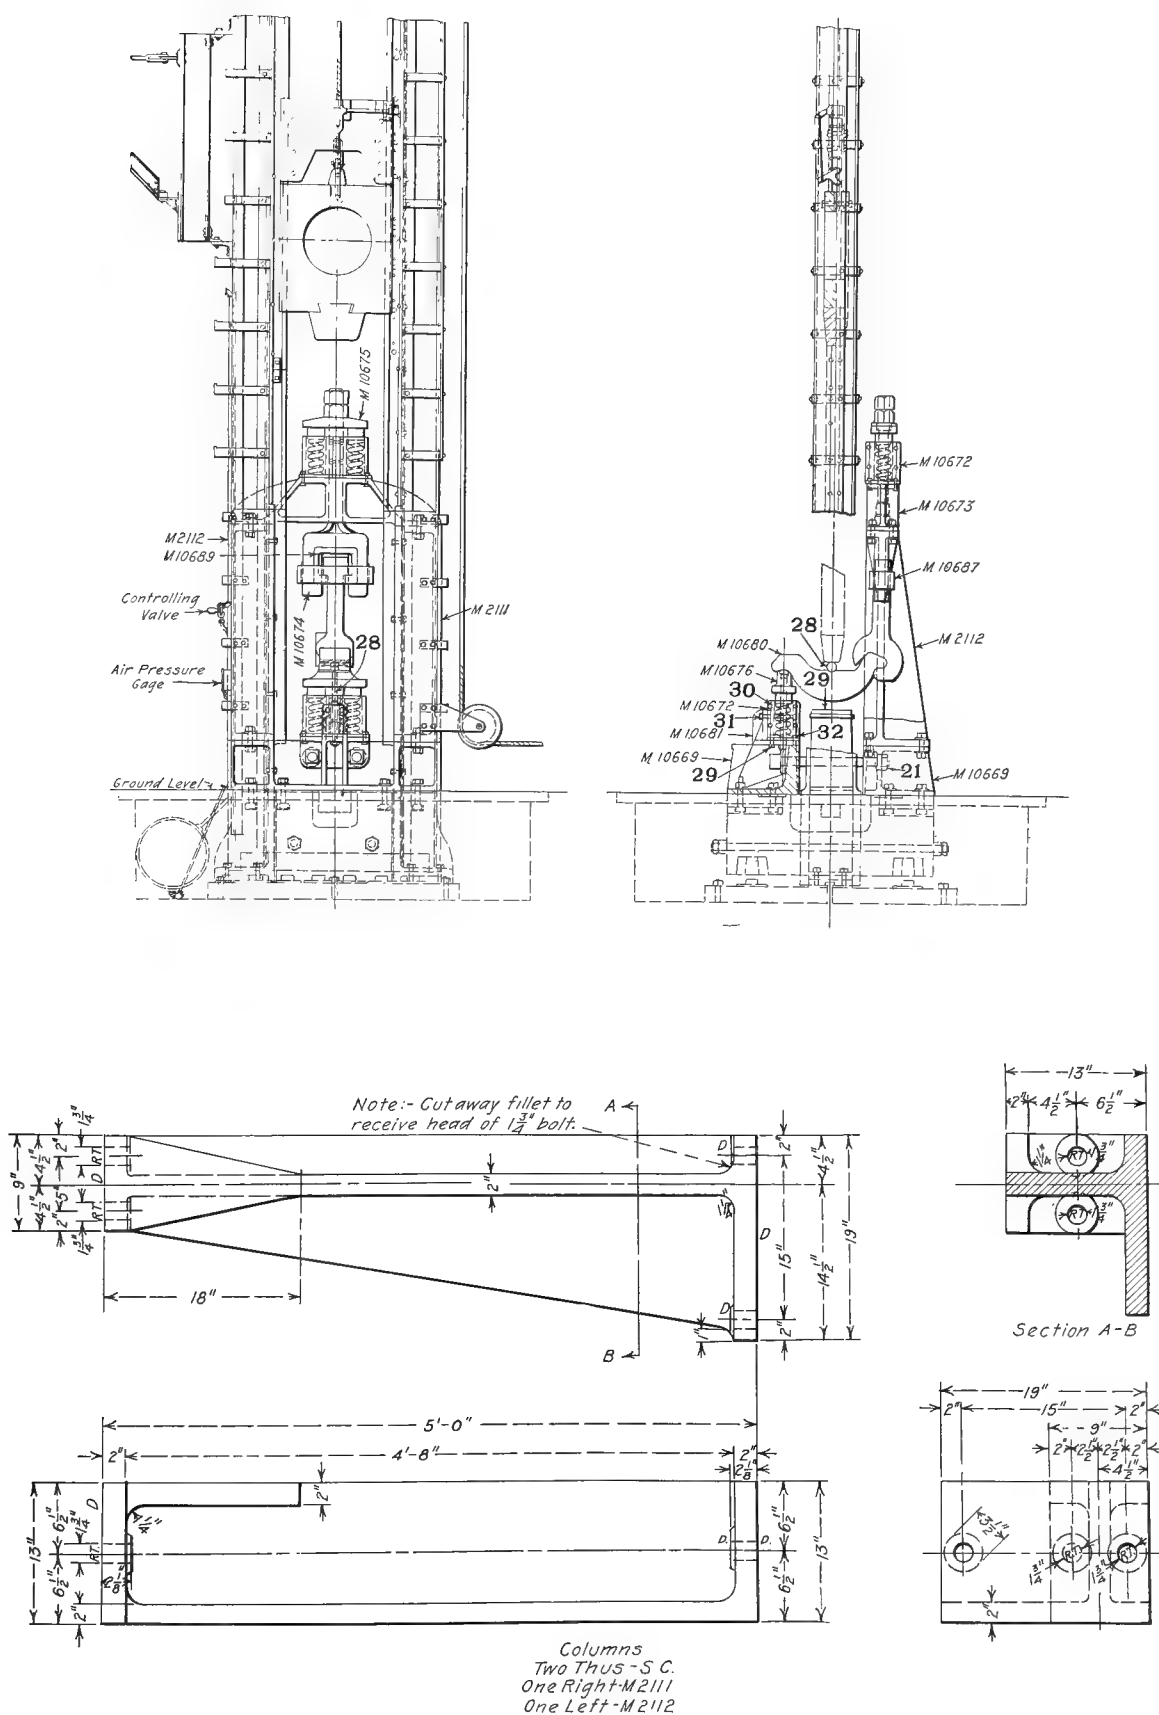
Details for Standard Jerk Test for M. C. B. Couplers. (M. C. B. Sheet 29A.)
